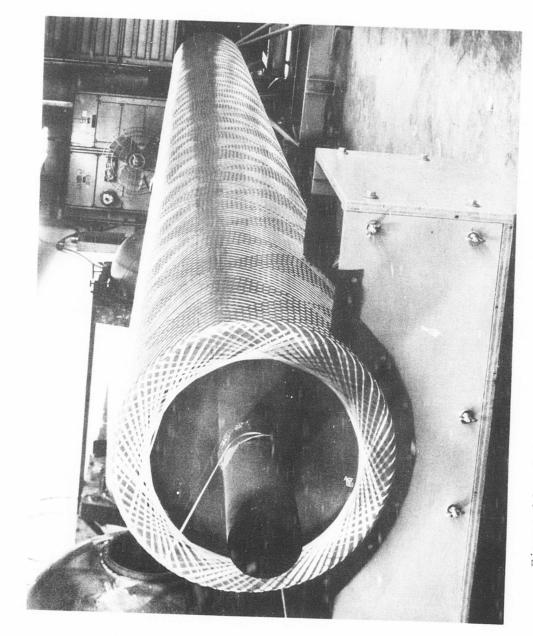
Trial Winding of Skin Material Using Dry Glass.
